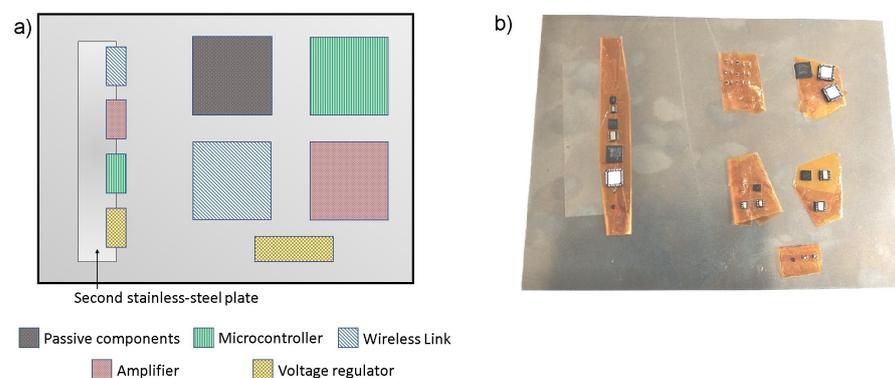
Components fixed on a stainless-steel plate two of each specimen fixed on the edge of another 120 µm thick plate. (a) Schematic placement. (b) Placement on the plate.
